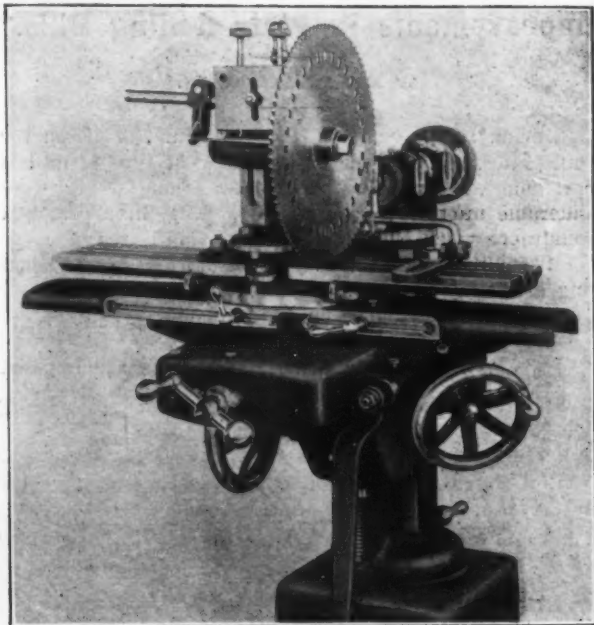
Sharpening a 16-In. Cut-off Saw.
